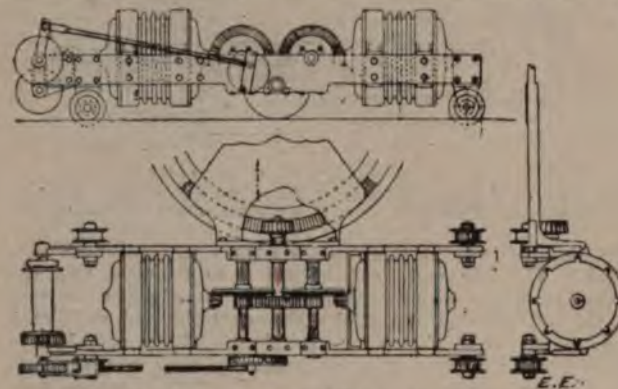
Two 10-h.p. Motors driving Coal-Cutter.
